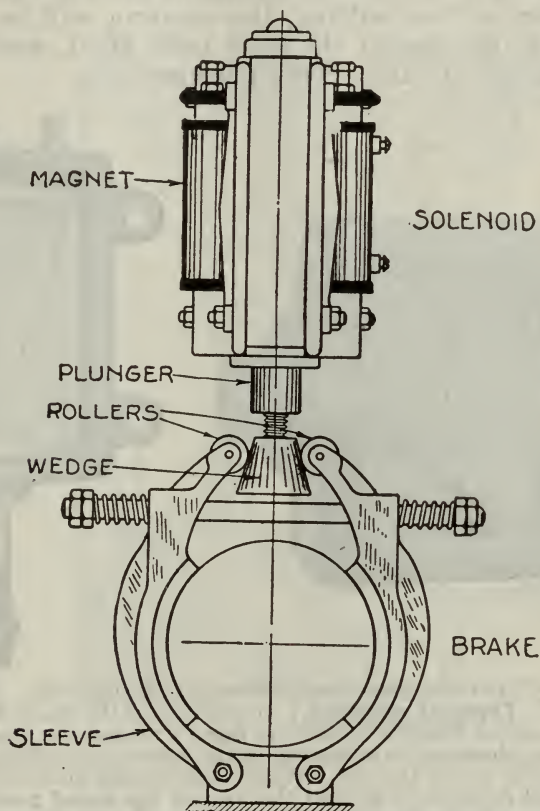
,157.—Typical arrangement of brake magnet having a wedge acting between rollers to release the brake.
